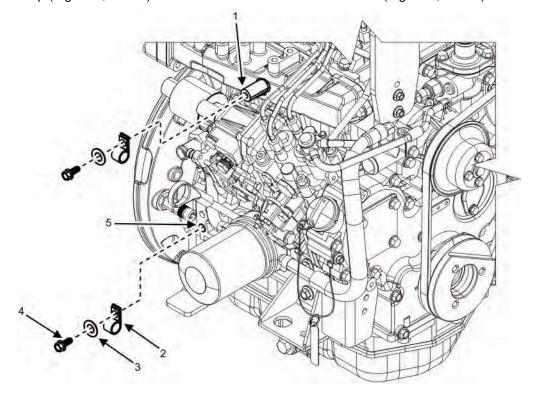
Electrical Connectors Clamp Intake Side — Removal.
